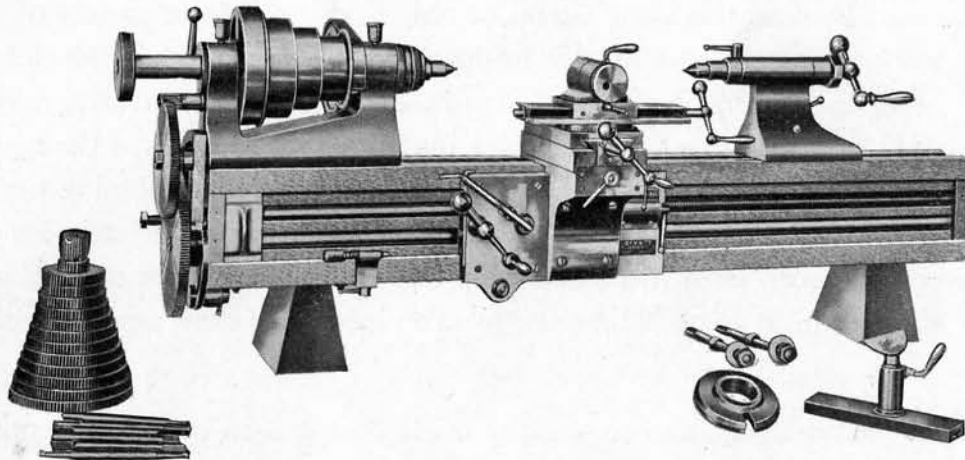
a. Rivett No. 608 Precision Back Geared Screw Cutting Lathe with standard equipment, except less countershaft and treadles.
